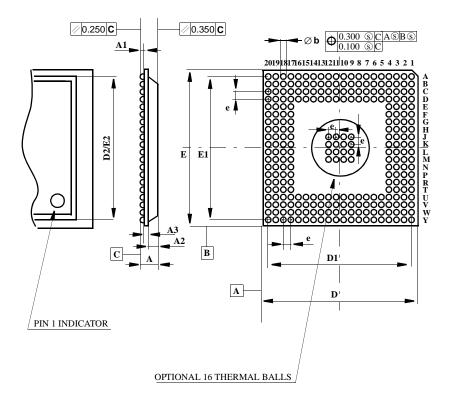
Physical Dimensions for 272-Pin BGA Package (RAGE 128VR)
